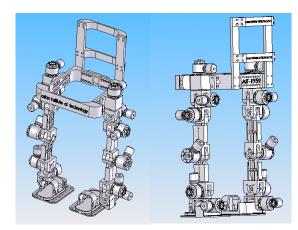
Prototype design of exoskeleton frame (lower part) (a) front view and (b) back view.
